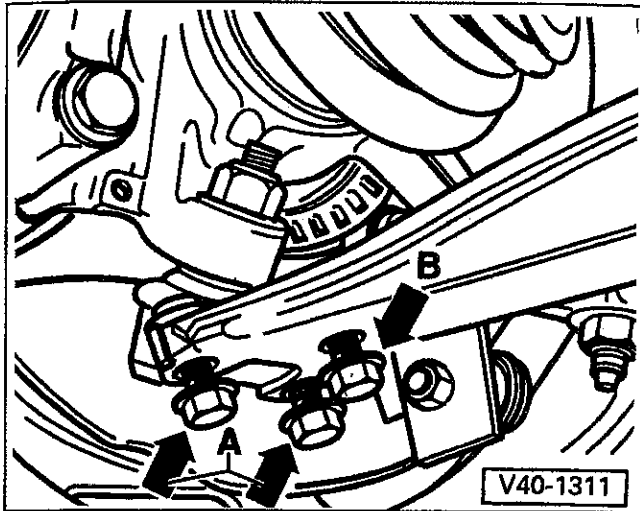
Ball joint mounting bolts. Loosen bolt (B) and remove bolts (A).
